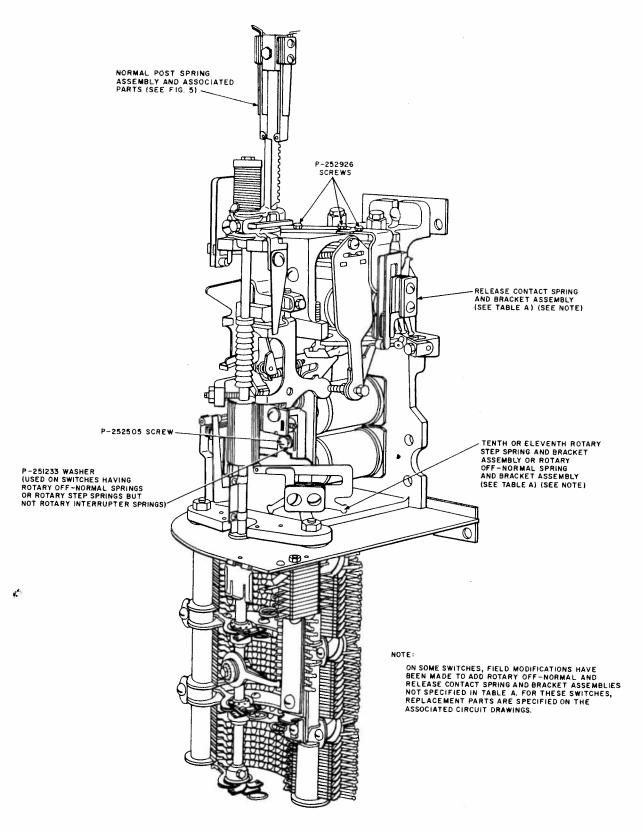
Contact Spring Assemblies and Associated Parts of 197-Type Switch as Viewed From the Right Side
